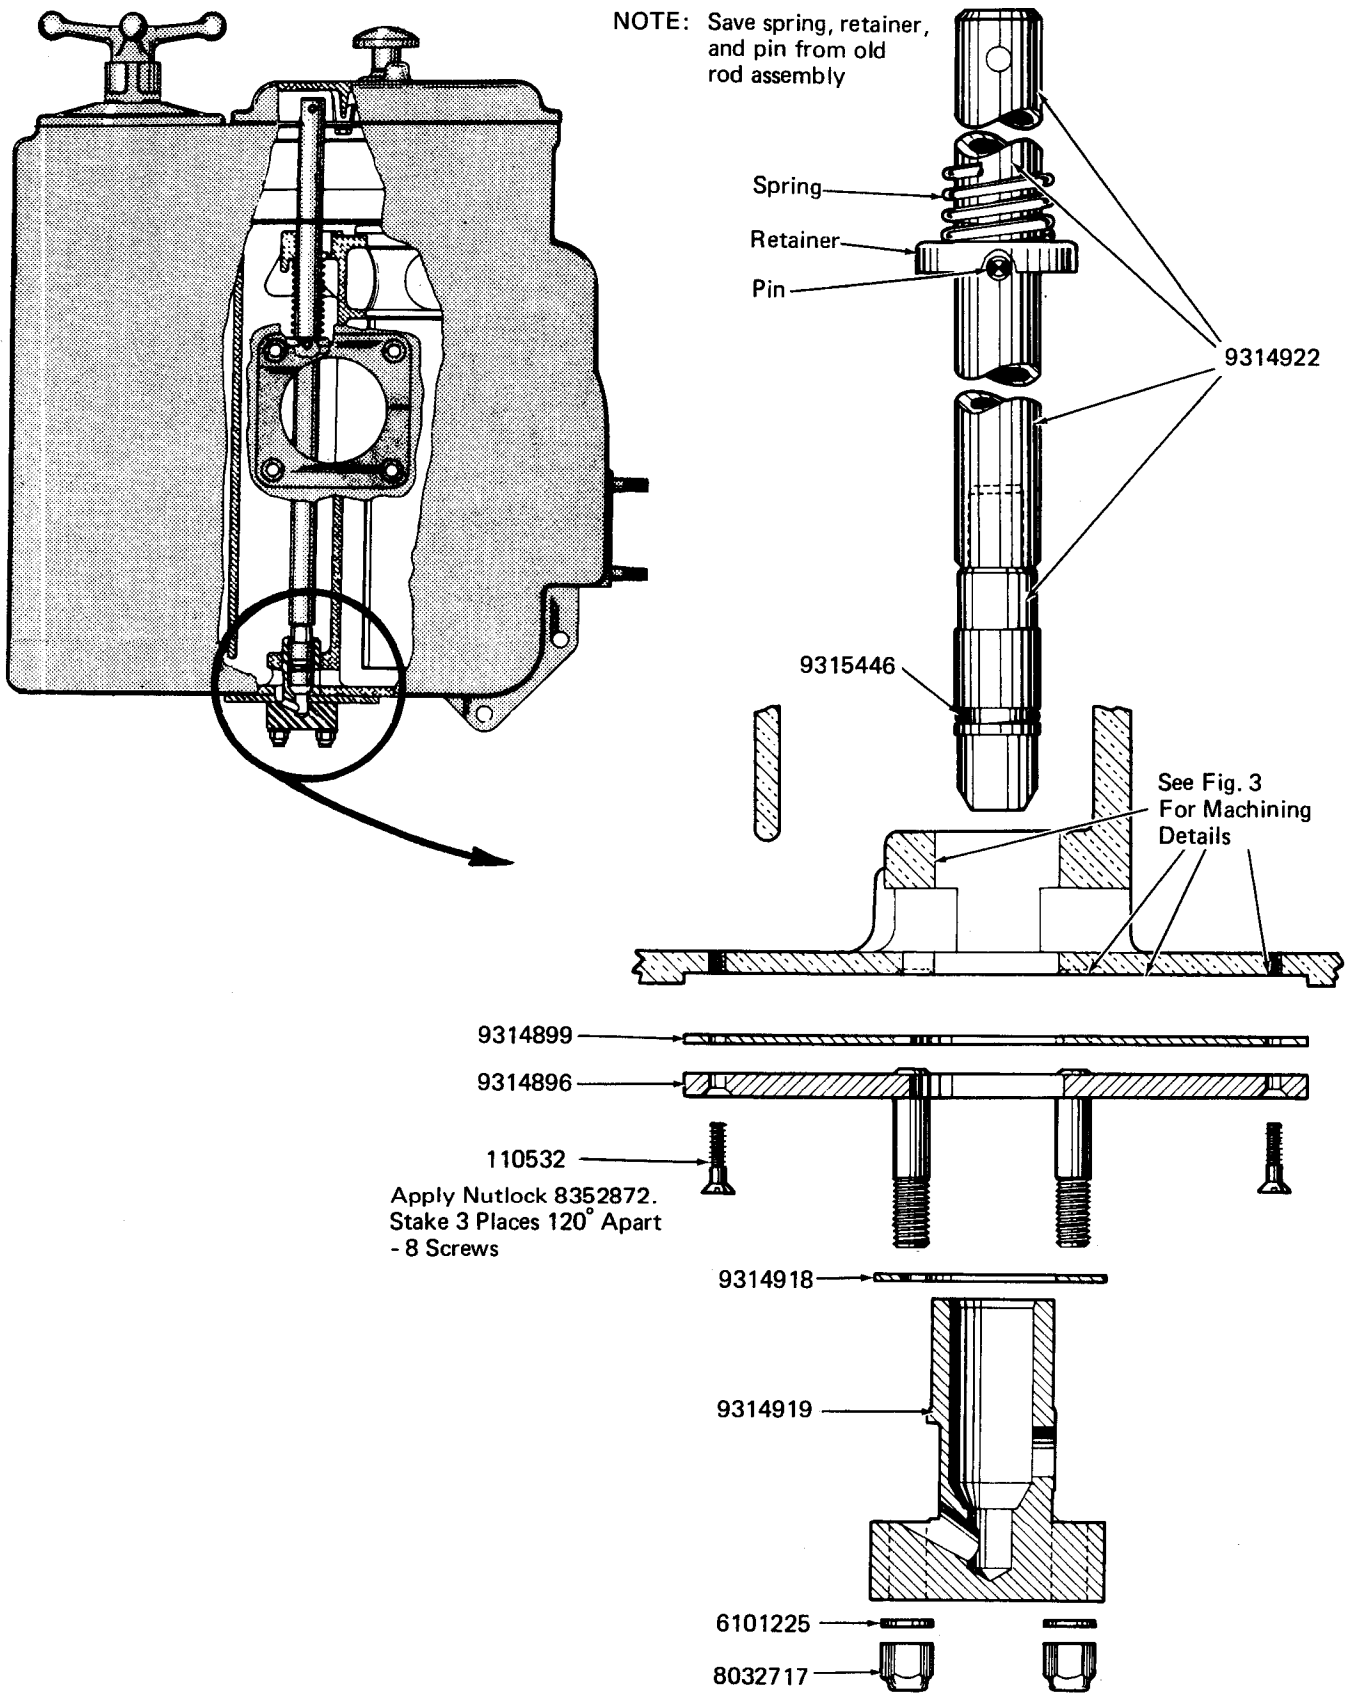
Strainer Housing Drain Valve - Exploded View
